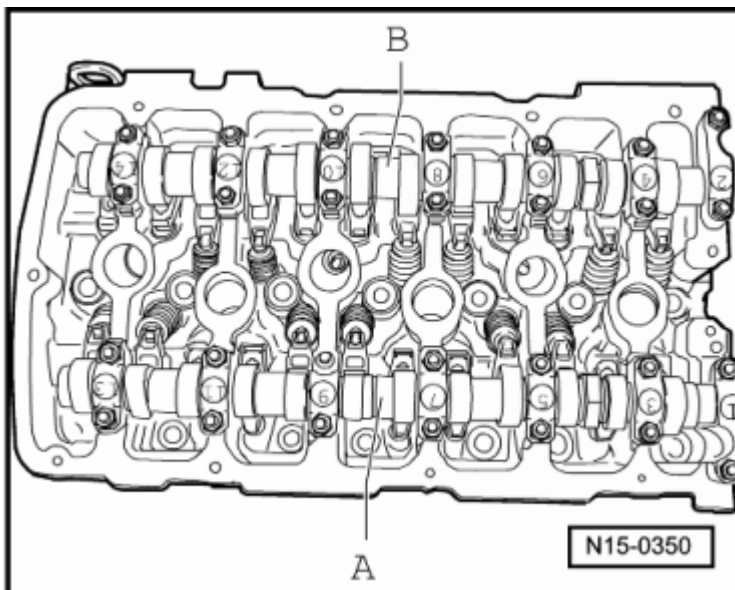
Identifying Intake Camshaft And Exhaust Camshaft
